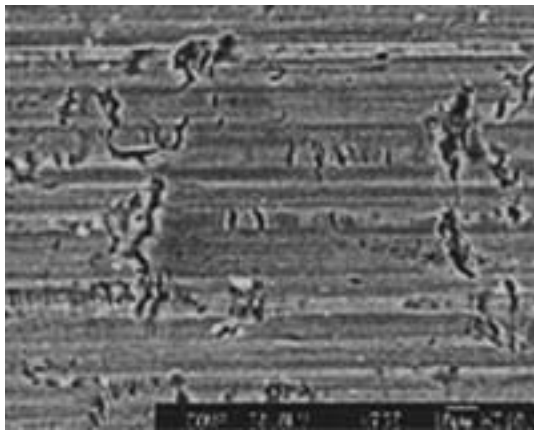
Surface defects due to excessive roll coating²⁾.
